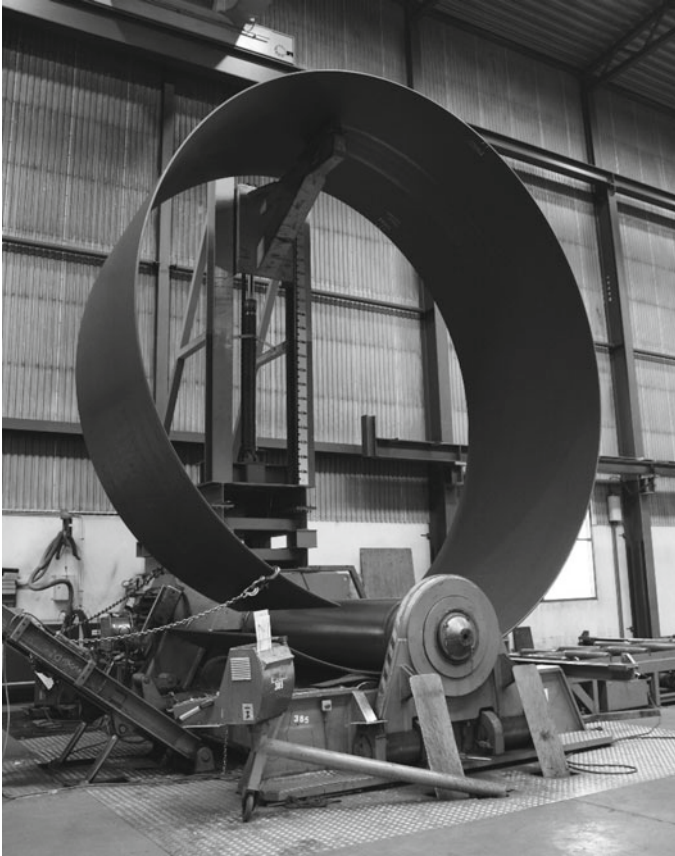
Forming process of a steel plate to a tower segment with a classic 3-rollers round bending machine [WETI]
